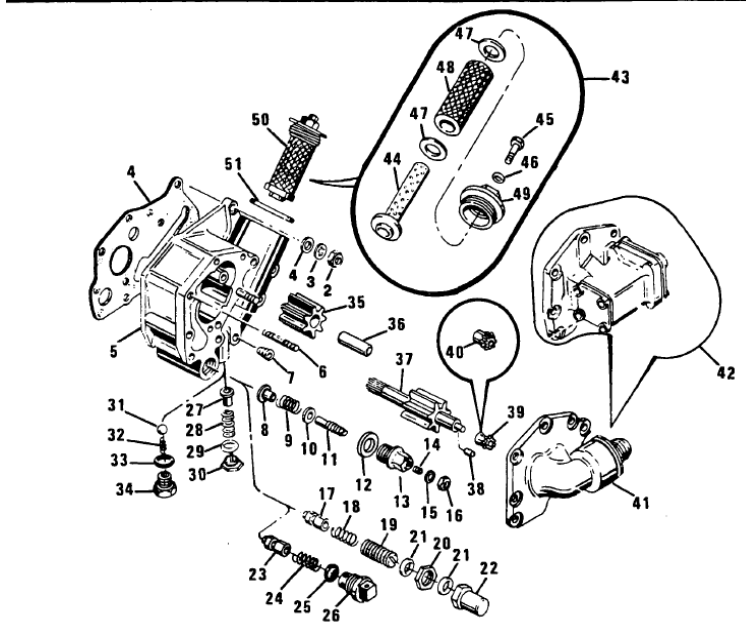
OIL PUMP ASSEMBLY
